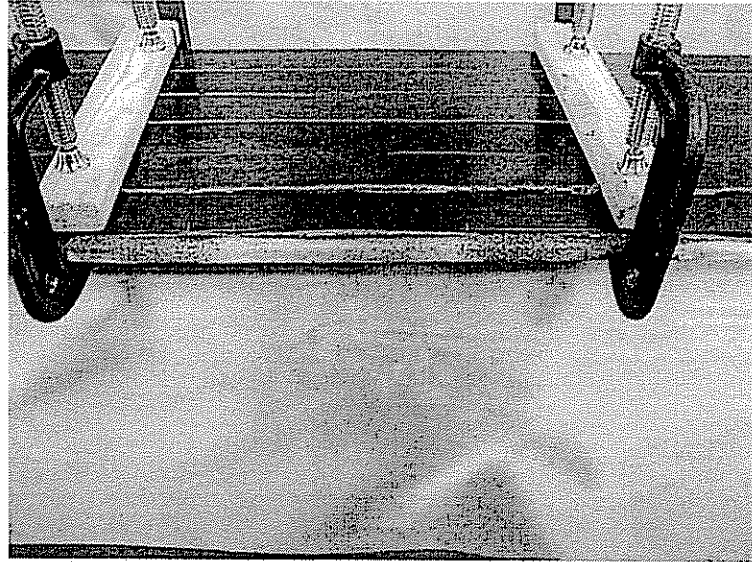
Close-up of adhesive squeezing through the scrim layer in the bond line indicating that it has been fully wet out.
